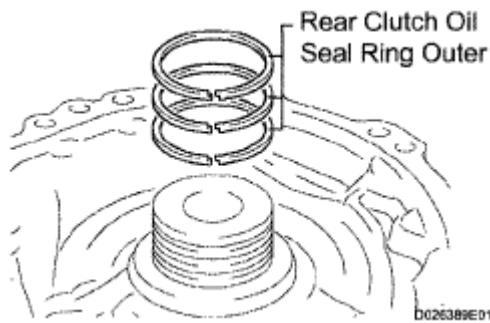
Identifying Rear Clutch Oil Seal Ring Outer
